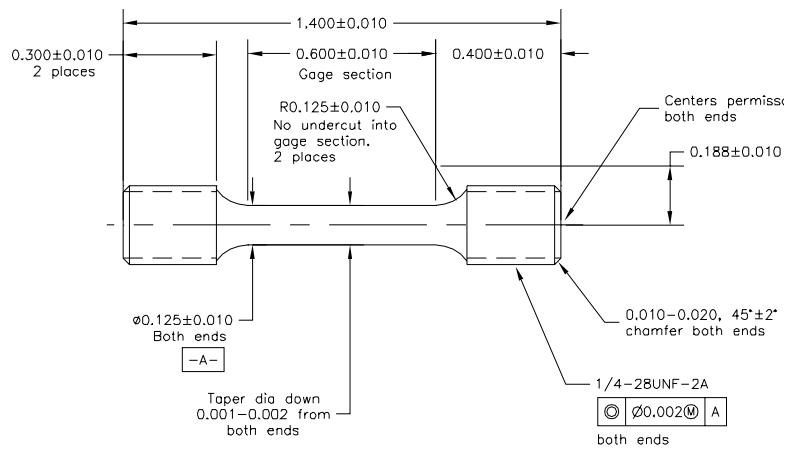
Dimensions of the 0.125 inch gage diameter tensile specimens.
